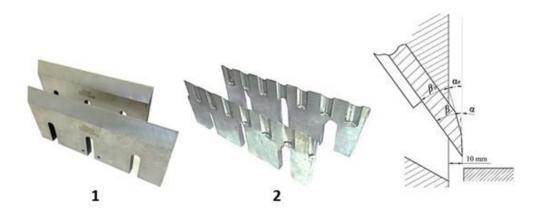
Chipper knives; 1 – with a straight cutting edge, 2 – with a modified cutting edge
